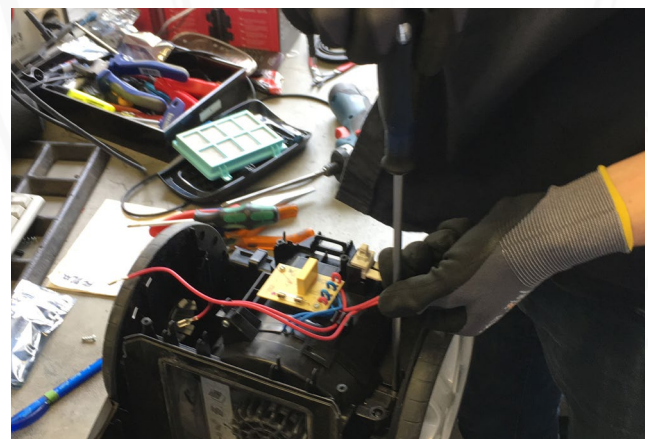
, Official repairer using a not standard long screw driver to reach the too deep screw
